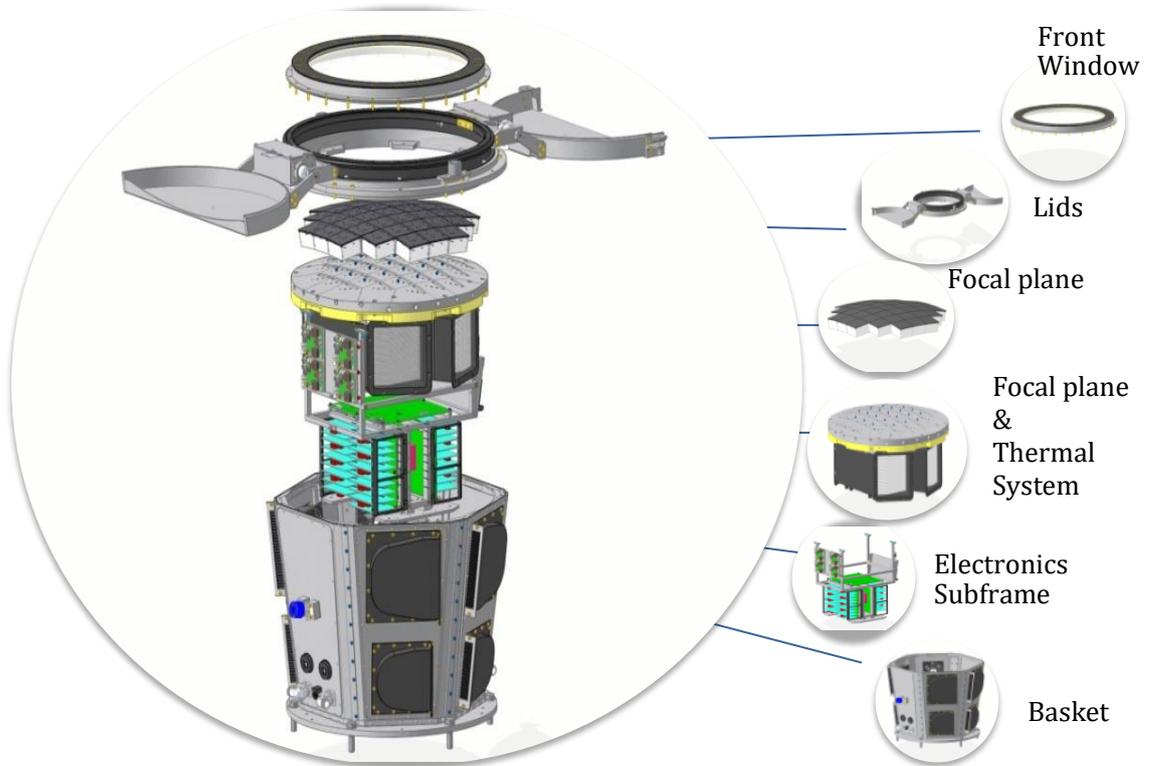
3D rendering of the ASTRI camera prototype - Exploded view
